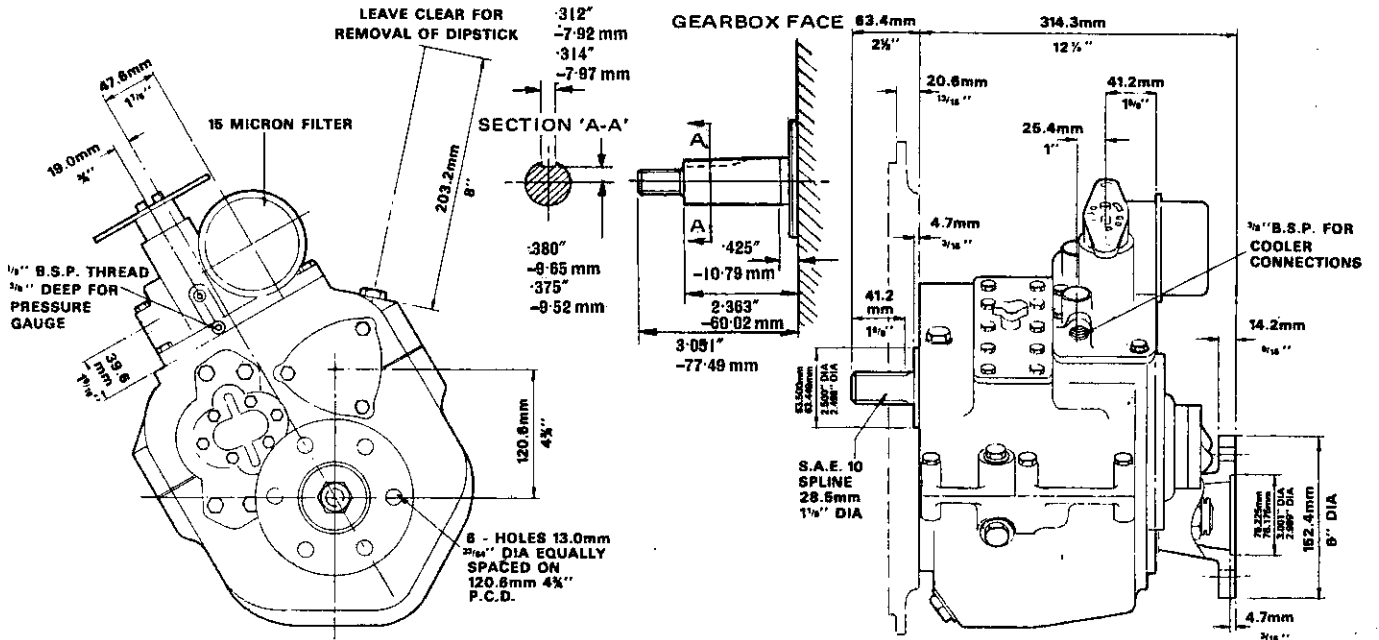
PRM175, 250 and 265 (S) & (T) Installation details
